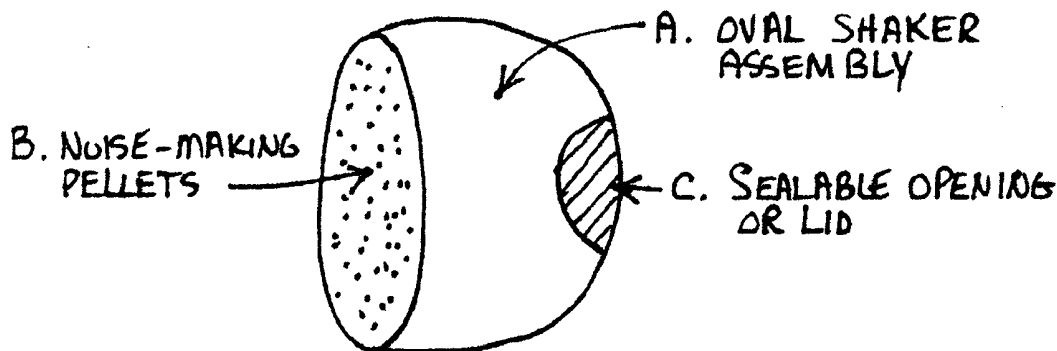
B CIRCULAR SHAKER ASSEMBLY
